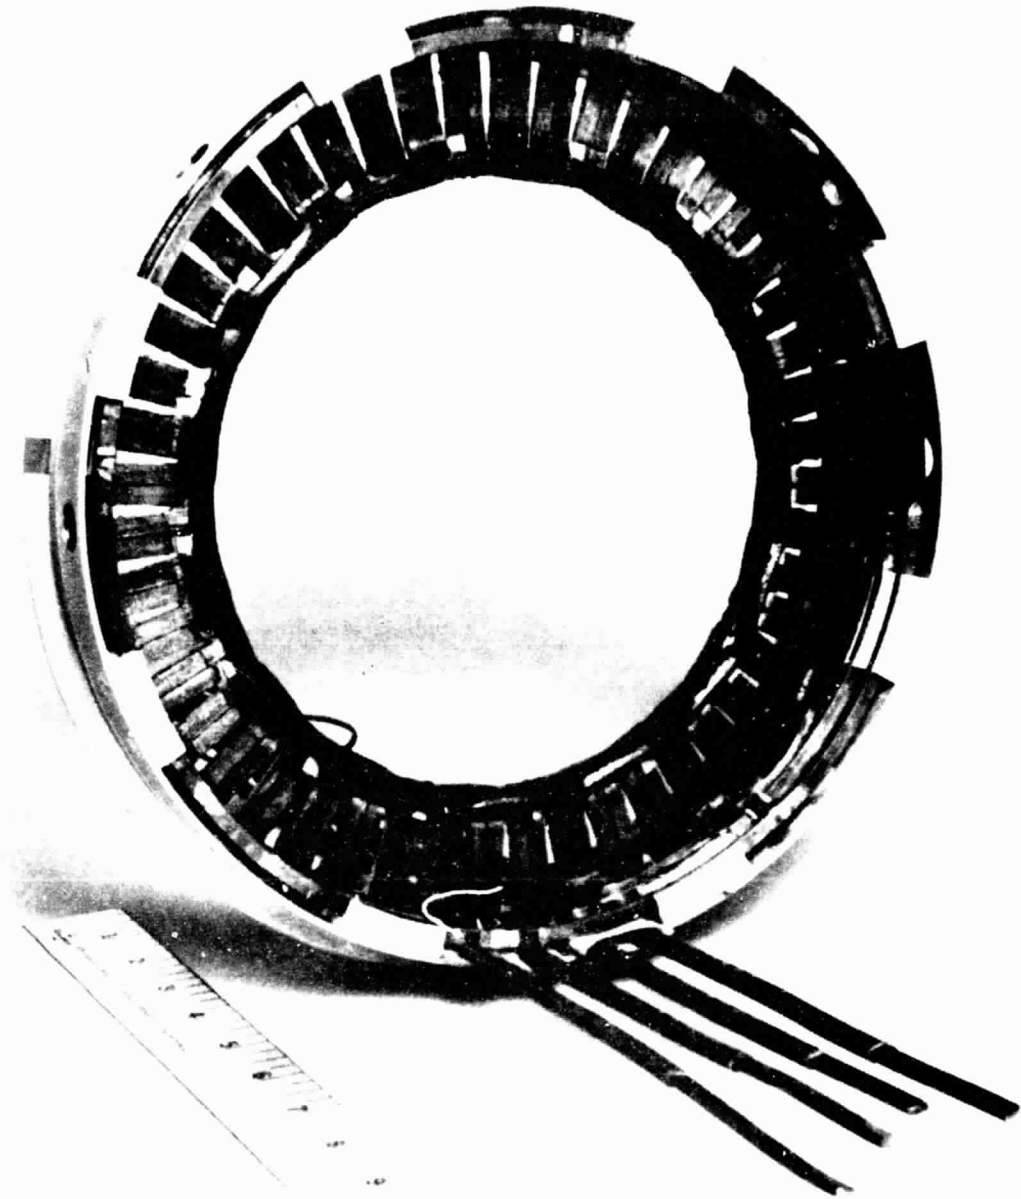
Partially Assembled Stator Winding Assembly Fixture.
